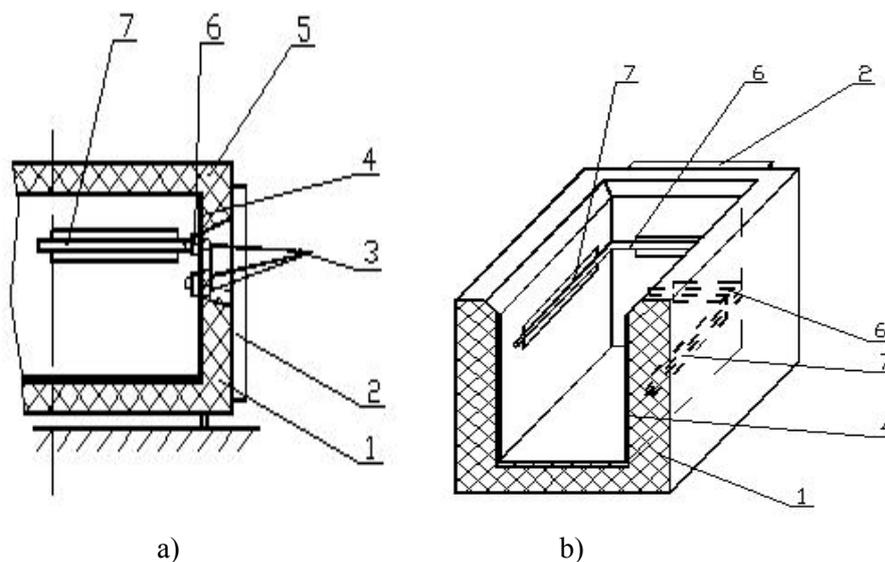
Refrigerator chamber of a “chest” type with ARA butted walls: a) – side view; b) – section. 1 – head isolation of refrigerator chamber; 2 – ARA; 3 – ARA evaporator; 4 – internal aluminium case; 5 – lid; 6, 7 – condenser and evaporator of a heating tube; 8 – actual chamber volume
